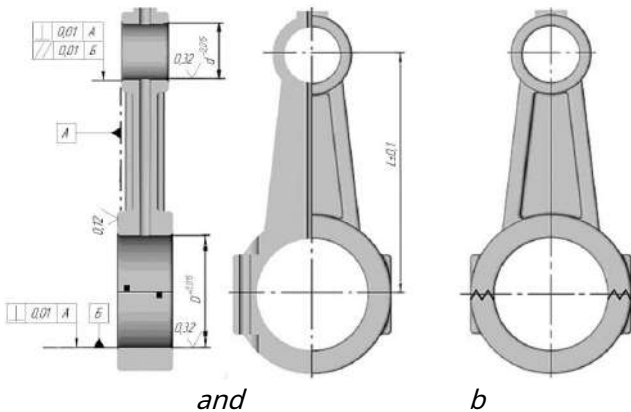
Connecting rods with a straight lower head connector: *a*- requirements for dimensions and surfaces; *b*- centering the cover on triangular slots
